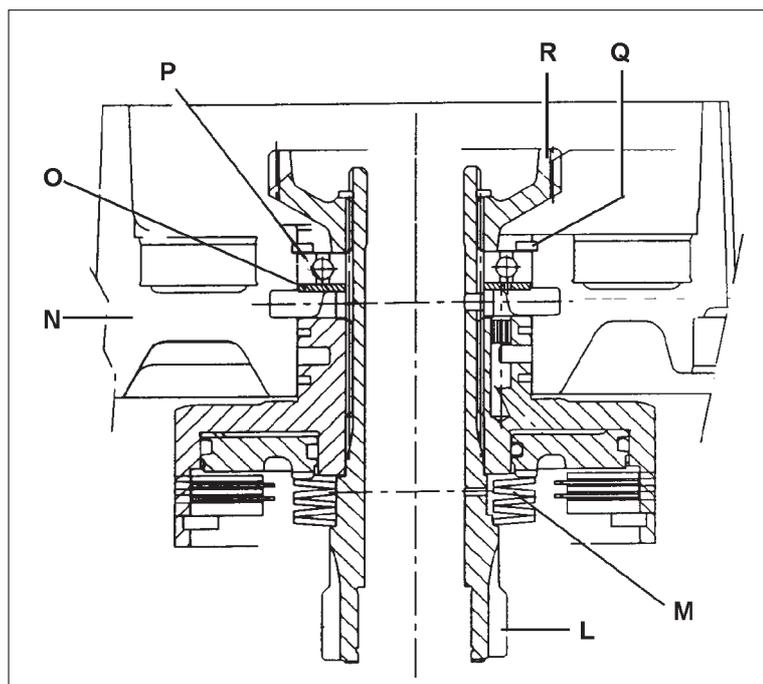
Preassembly of parts on MEDIUM shaft.
